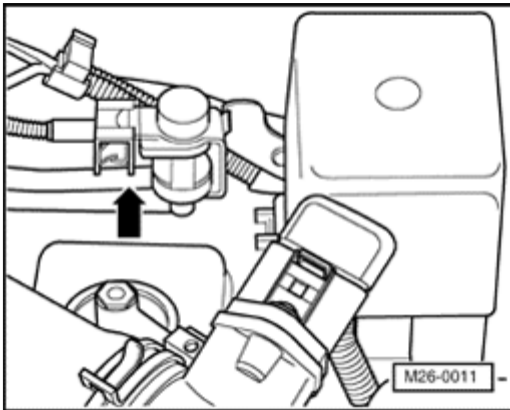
Secondary Air Injection Solenoid Valve Upper Vacuum Hose
